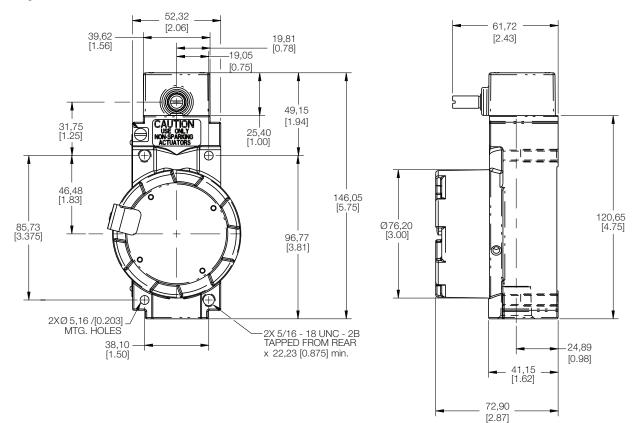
MICRO SWITCH BX2 Series Top Plunger Product Dimensions • mm [in] Top Plunger - Head Codes: C and D
